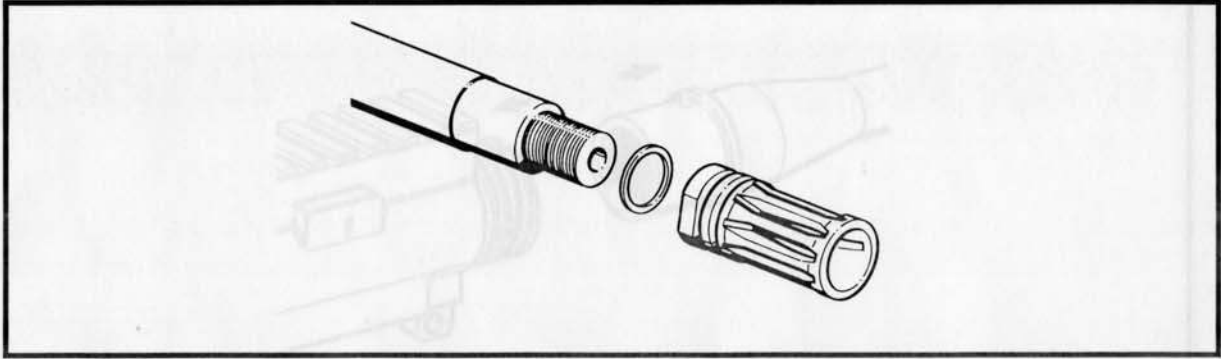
Removing the Compensator and Compensator Spacer
